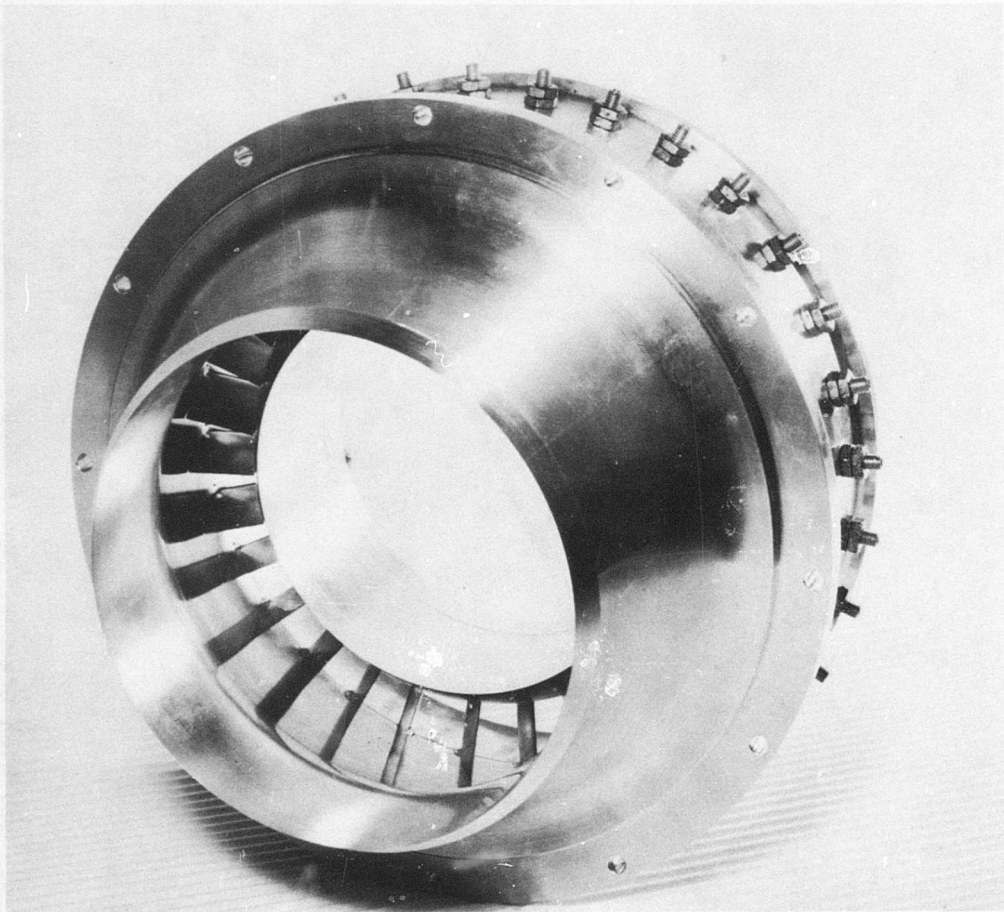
Downstream View of Inlet Guide Vane Assembly.
